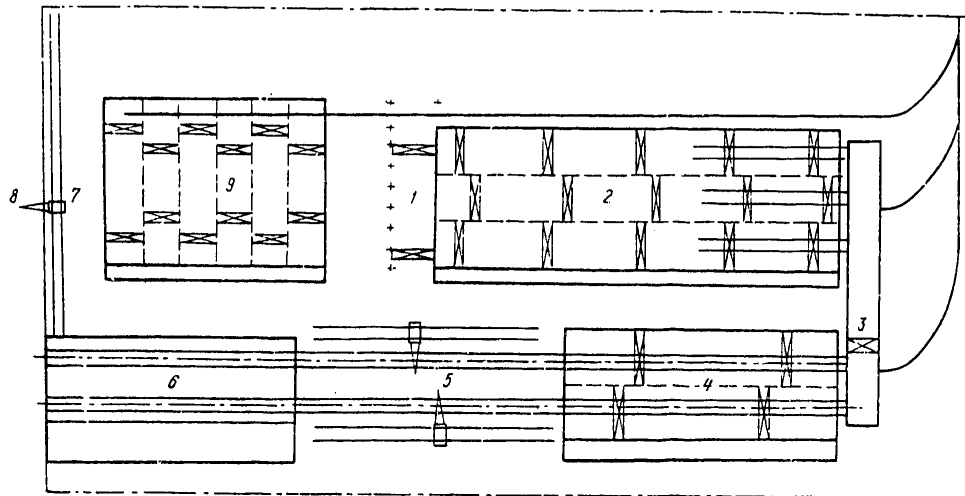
Master plan layout of the main facilities of a Class III shipyard. 1-- steel storage area; 2--hull shop module (hull platers, assembly-welding, assembly of modules); 3--conveyor; 4--covered slipway (shipbuilding shed); 5--uncovered shipbuilding ways; 6--wet dock; 7--outfitting quay; 8--water; 9--makeup and outfitting shop module.
